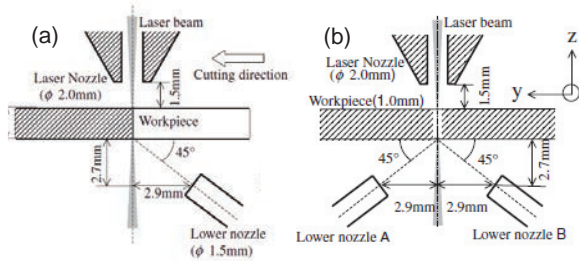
Schematic of laser cutting with (a) single lower nozzle and (b) dual lower nozzles [8].
